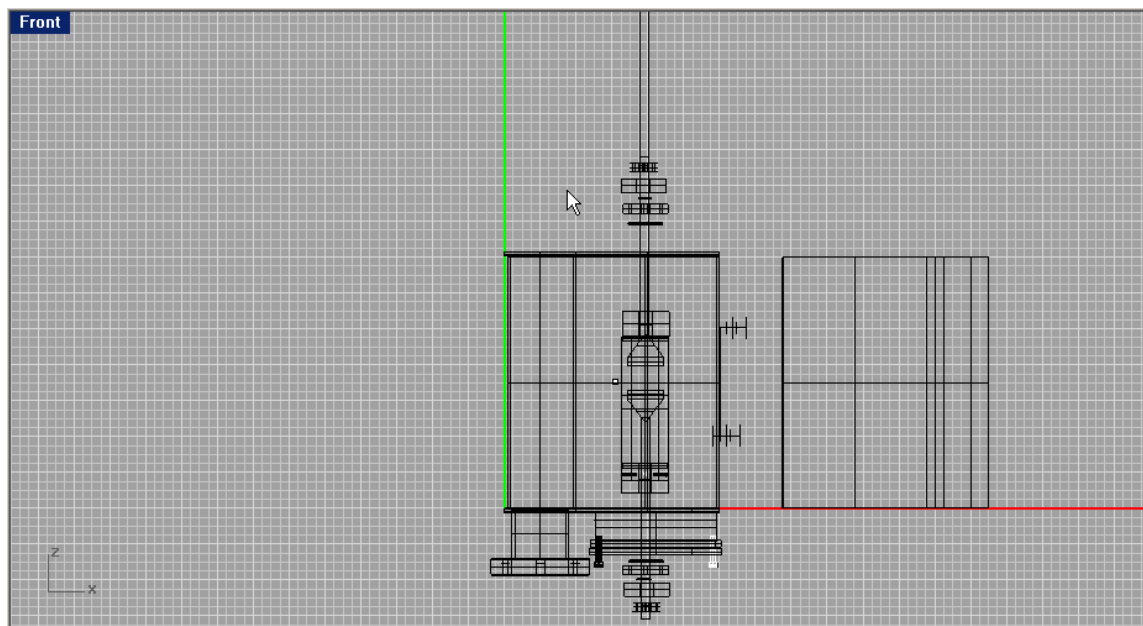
Front view of prototype switch w/ vacuum ion pump pod and magnetic plates.
